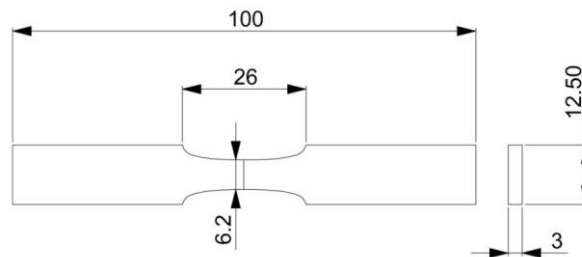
Dog-bone shaped specimen with a central joint for fatigue tests (dimensions in mm)
